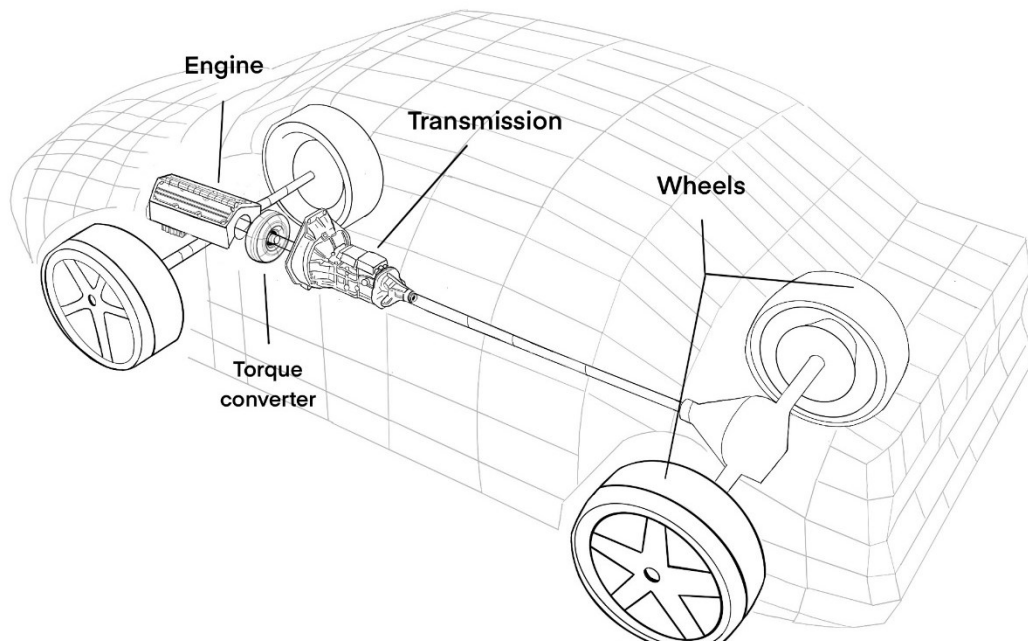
Rear Wheel Drive Vehicle Drive Line
